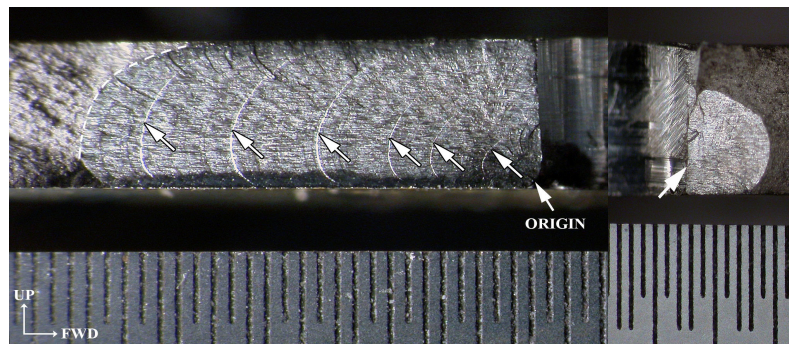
Overall view looking inboard of 0.263" 5 o'clock crack and 0.067" 11 o'clock crack. 5 o'clock crack initiated at lower surface at some damage (possibly partial deburring). 11 o'clock crack initiated in hole close to lower surface. All six marker bands in the 5 o'clock crack were observed using the SEM, but none in the 11 o'clock crack.
